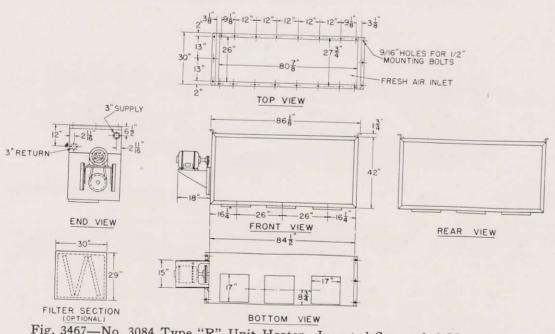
No. 3084 Type "R" Unit Heater. Inverted Suspended Mounting.
